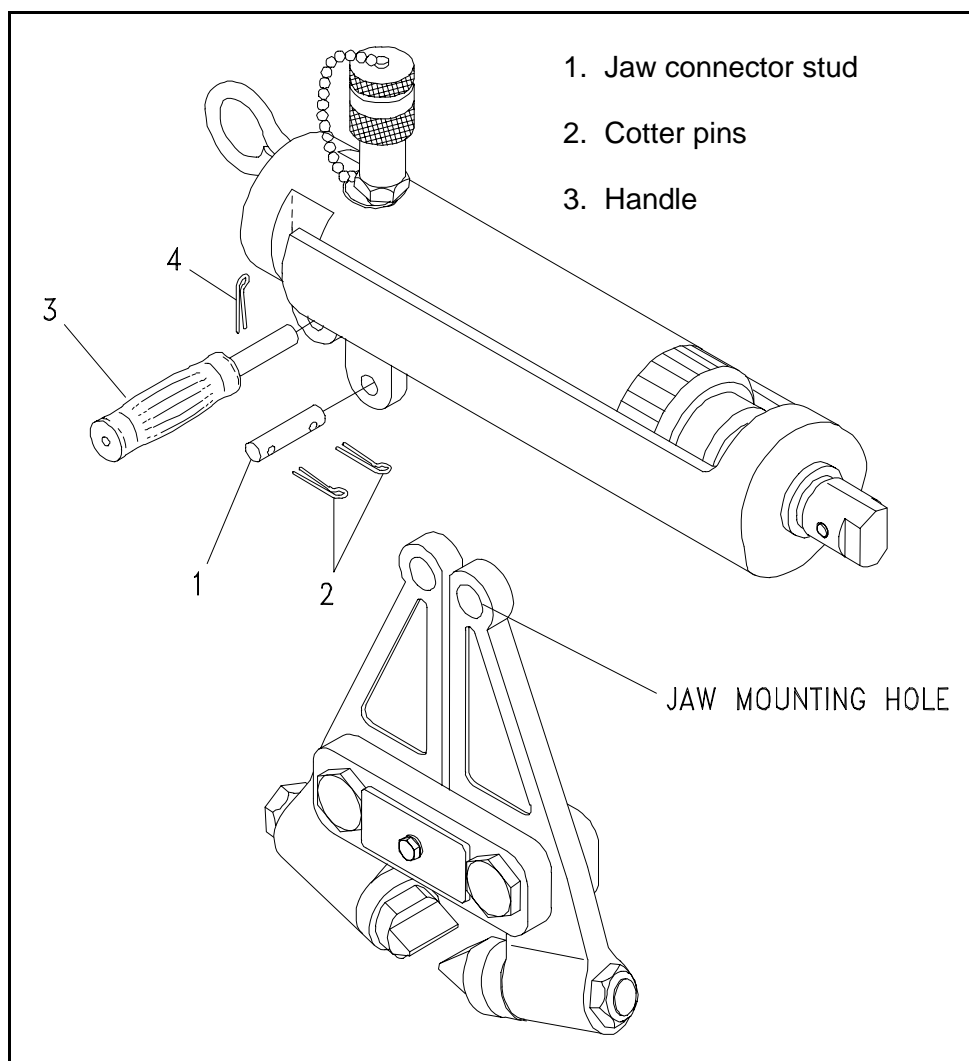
Attaching Cutterhead to Cylinder Assembly.
